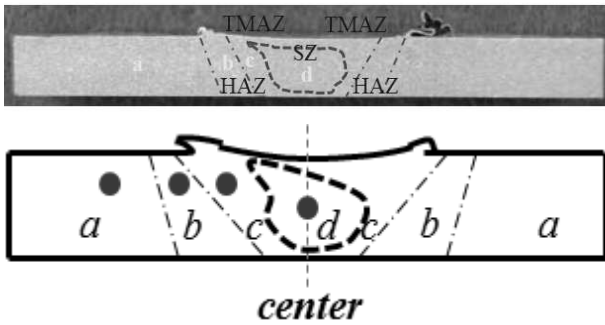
Cross-section view of friction stir weld regions in Al 7075-T651
